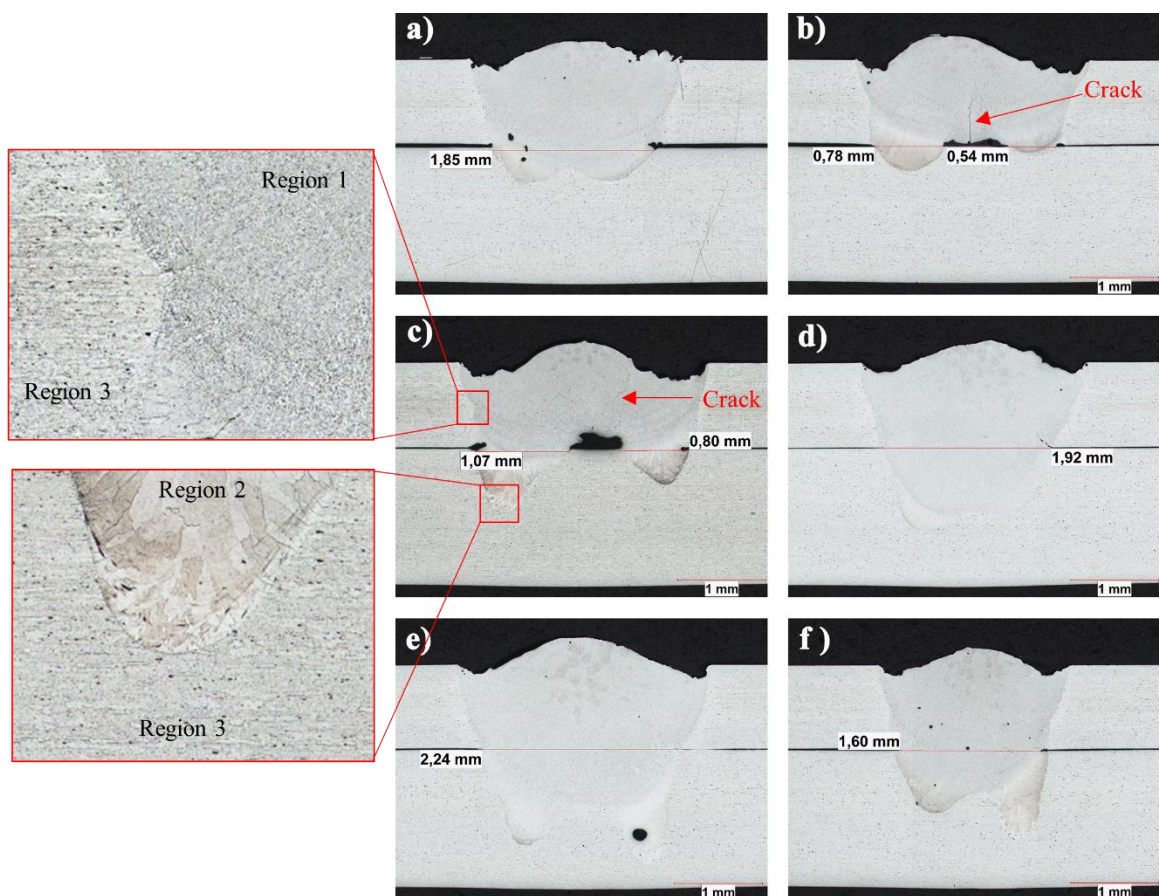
Welding cross-section for samples number a) 1, b) 2, c) 4, d) 5, e) 7, and f) 9 which are welded with power intensity more than 13.2 J/mm^2
